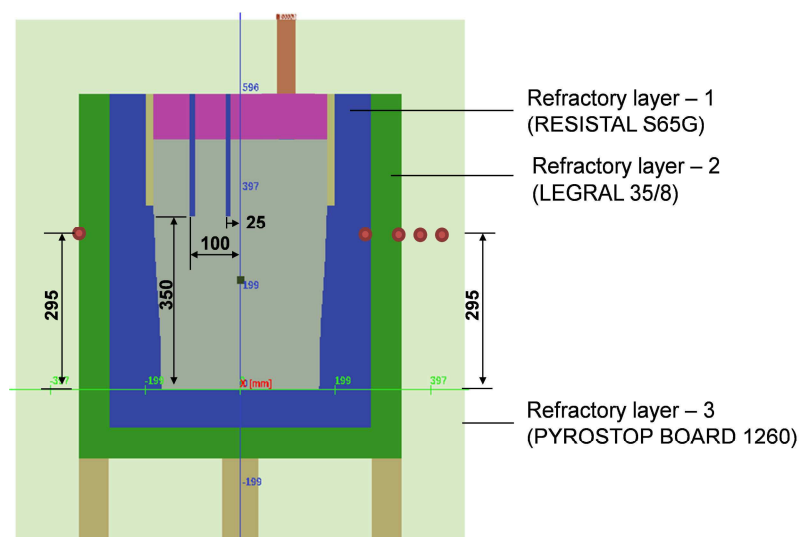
Schematic illustration of the mould and the tundish for the 500 kg ingot (side view)
